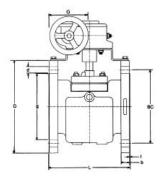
Full Bottom Jacket Using Valve Body Standard Flanges (Jacket Pressure Rating Available in 150 & 300 lbs)
